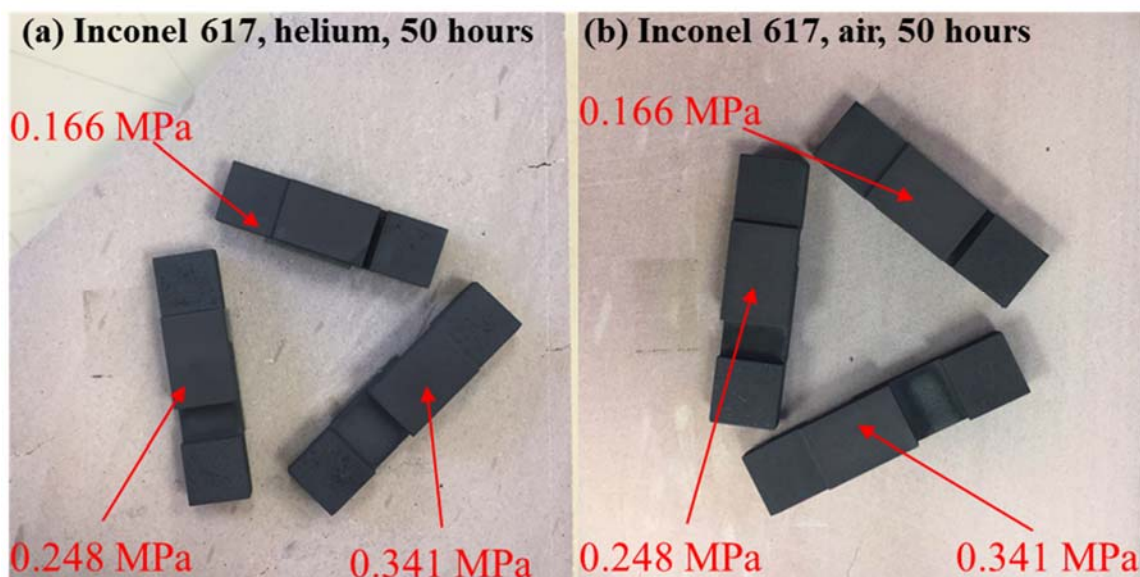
Self-welded Inconel 617<sup>®</sup> after 50-hour aging in: (a) helium; (b) air.
